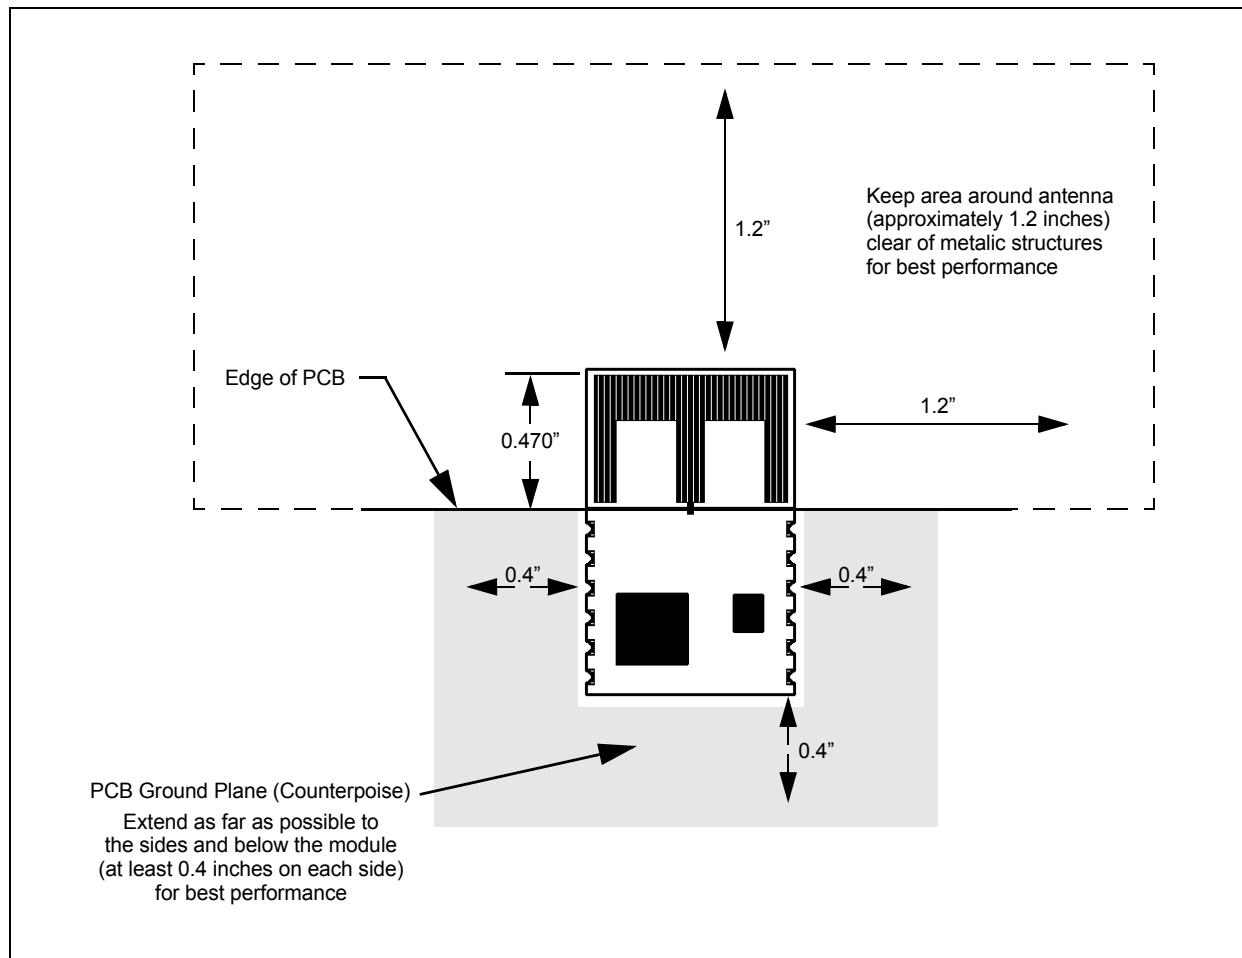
RECOMMENDED PCB FOOTPRINT
